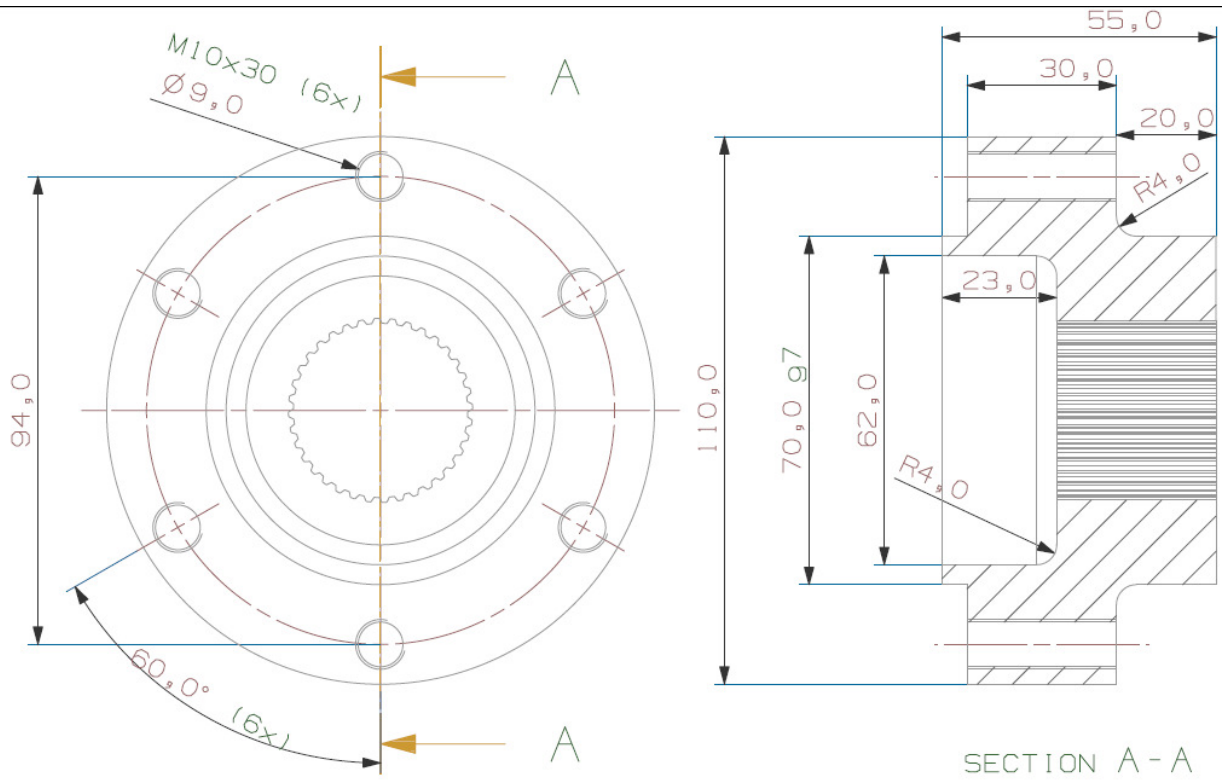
Manufacturing drawing of adapter for test bench, manufactured at VDL
